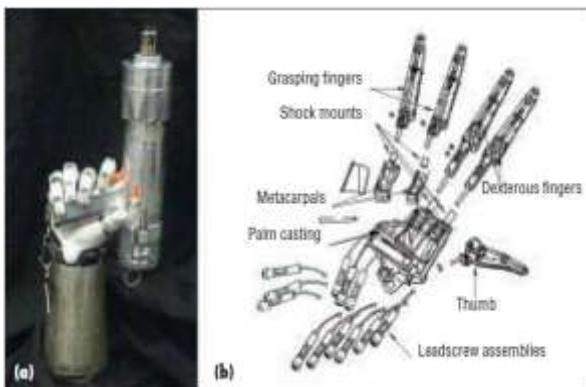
Robonaut's (a) hand, holding a space torque tool; (b) hand parts, showing the dexterous and grasping sets.
